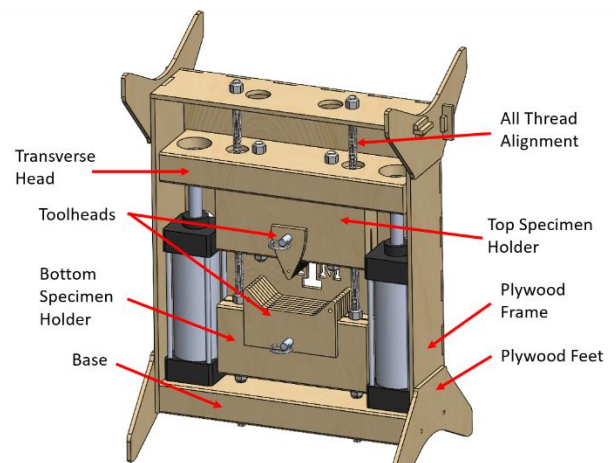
Personal Universal Testing Machine (PUTM) kit used in this Paper.
